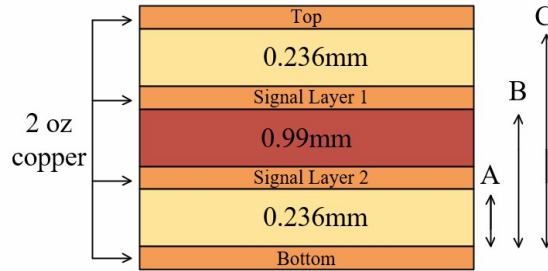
1.6mm 4-layer PCB with 2oz copper trace dimensions
